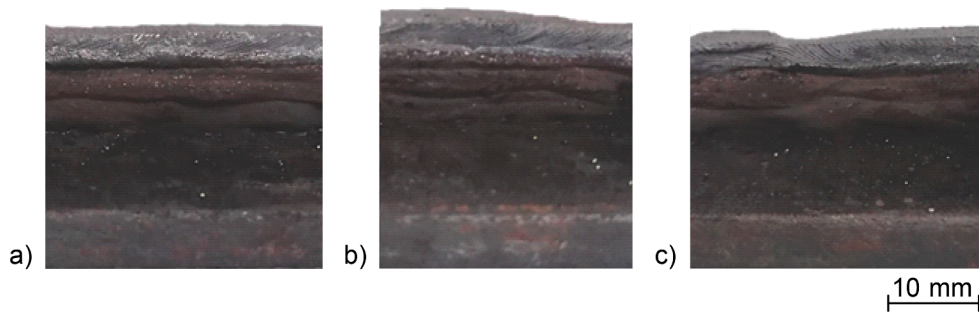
Forging surface morphology of the parts produced in: a) P1, b) P2 and c) P3 work areas.
